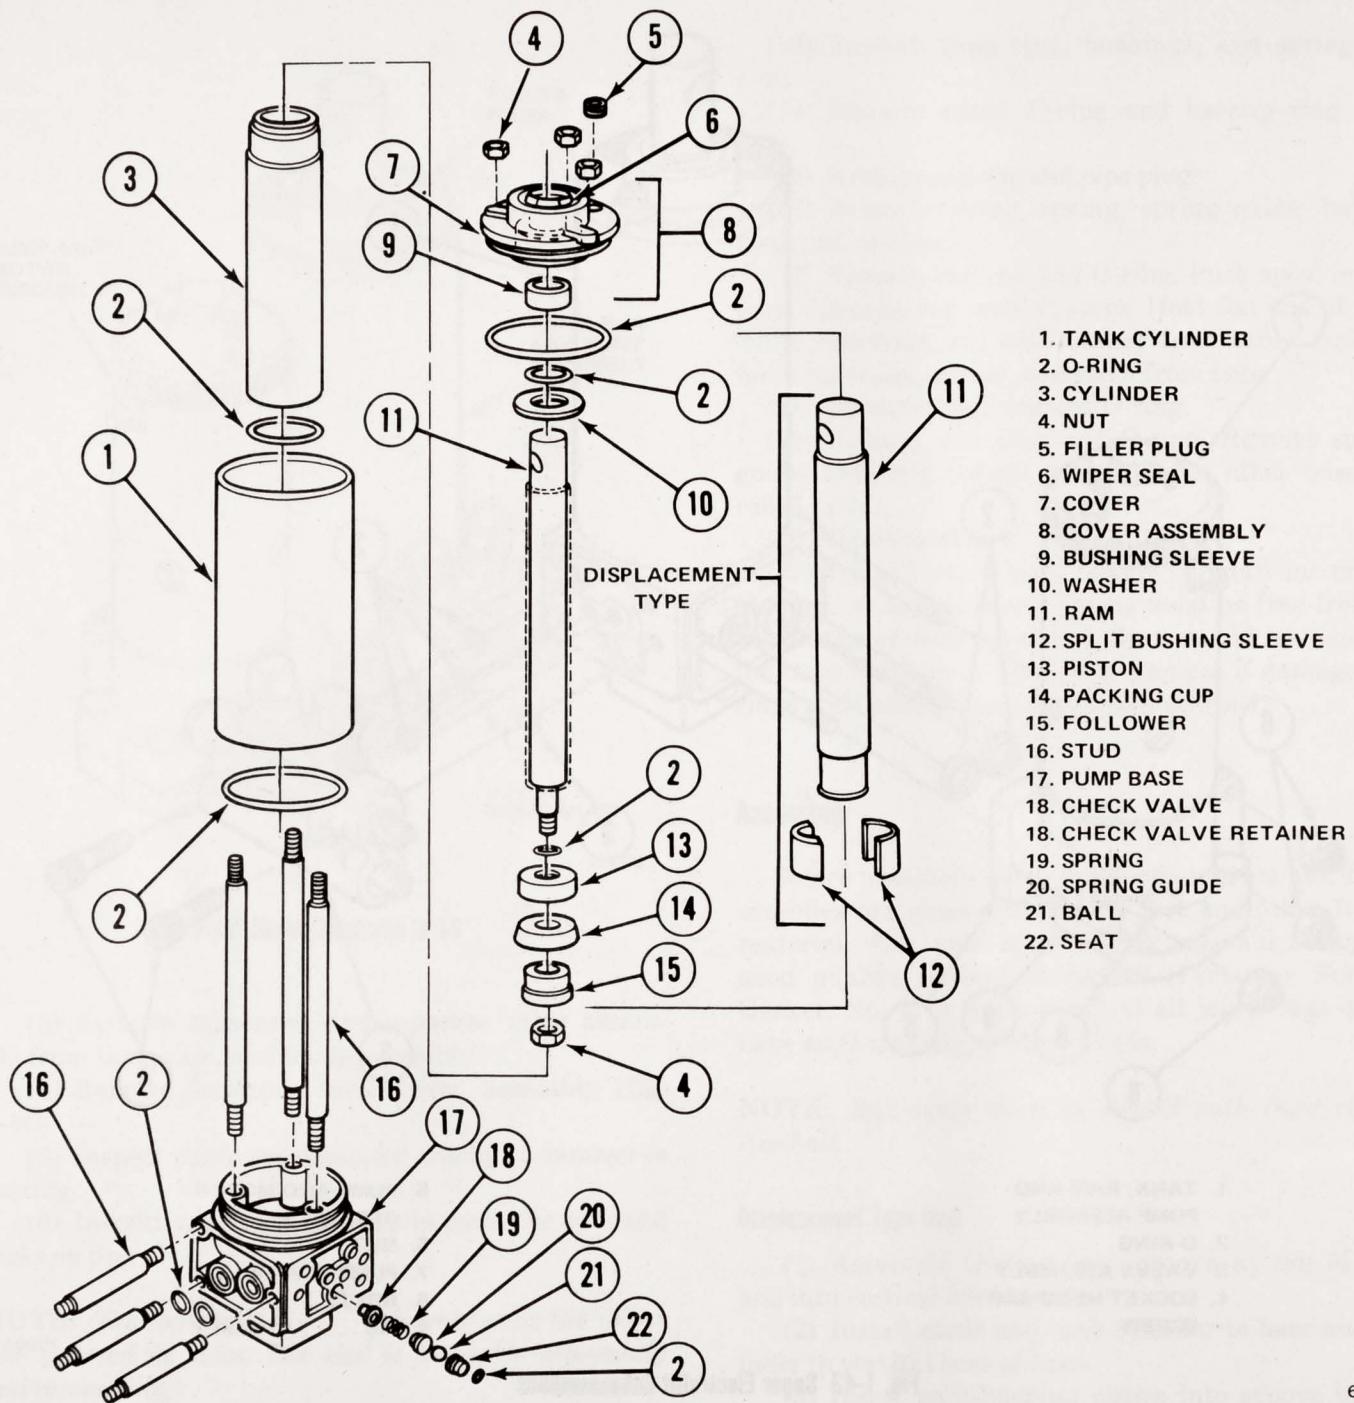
Cover Assembly, Tank, Ram, and Cylinder
